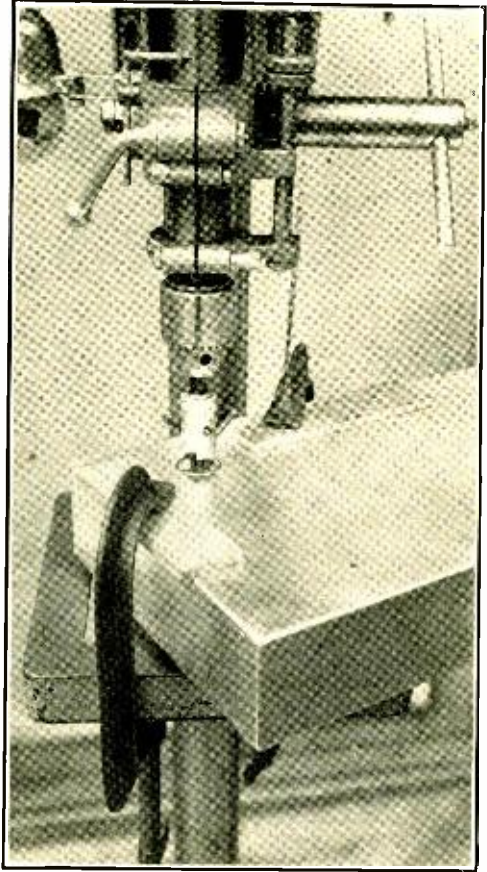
Showing how the work should be clamped for use of a fly cutter in making large holes.
